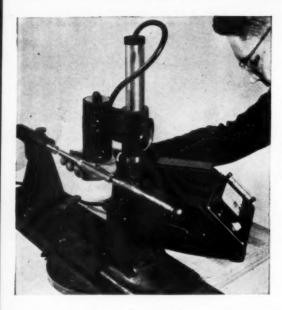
Gage head may be swiveled around column to any position for special setups, such as this reamer inspection.
